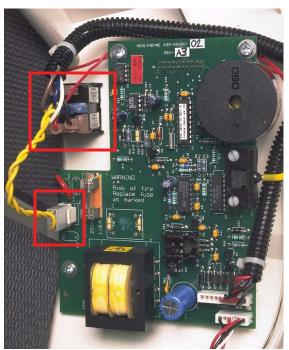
FIGURE S: MAIN PCB (J2) AND POWER SWITCH LOCATIONS
